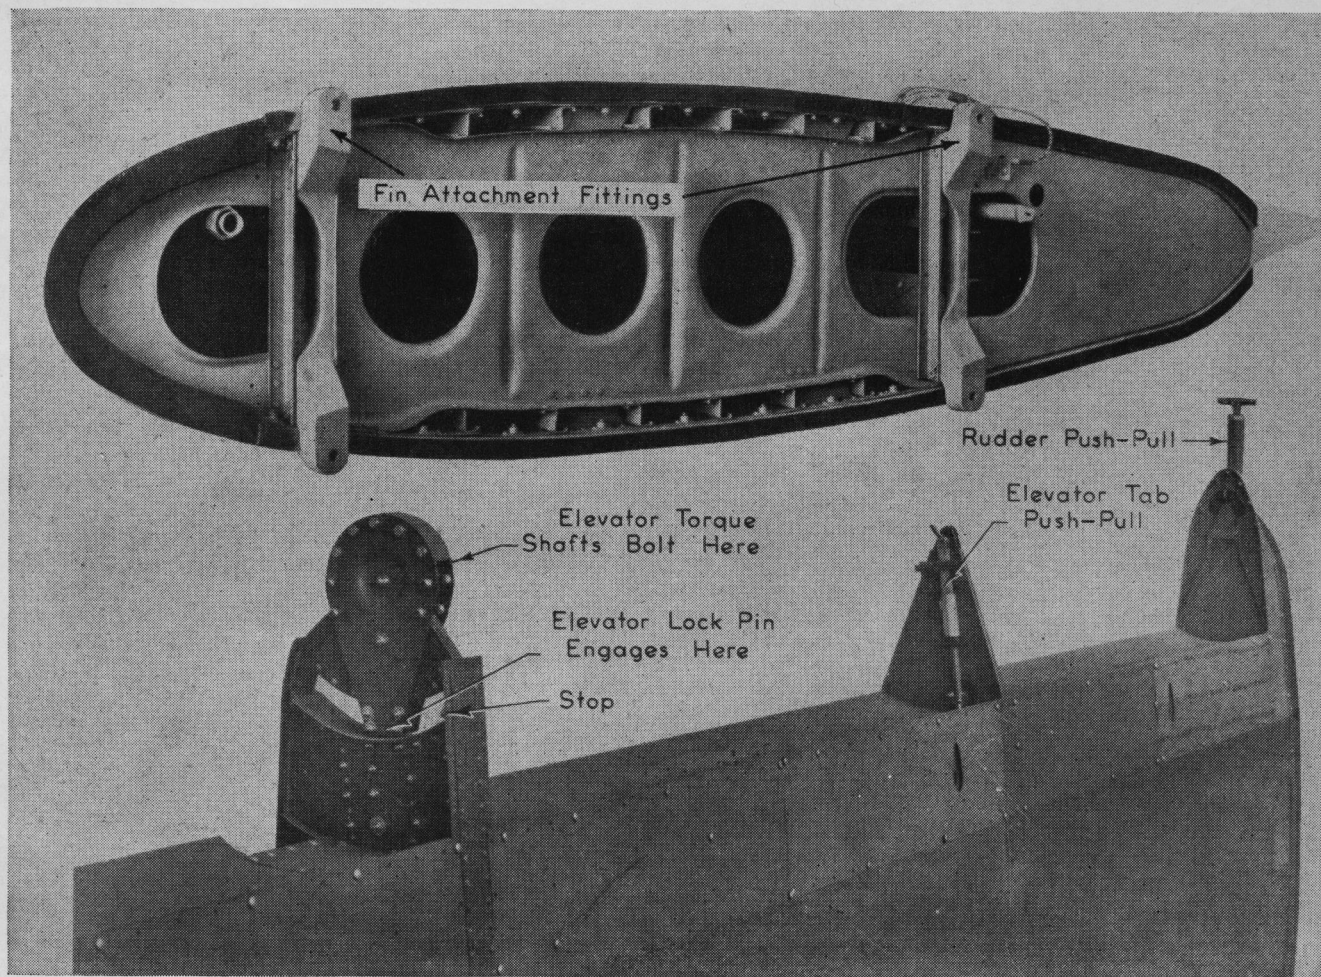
Close-up (1) showing details of the horizontal stabilizer depicted in (1a). Carrying the entire load of the tail group, four aluminum alloy forgings, riveted to stabilizer spars, are used for attachment to similar fittings on the fuselage. Eight bolts are used in the stabilizer-fuselage connection.
